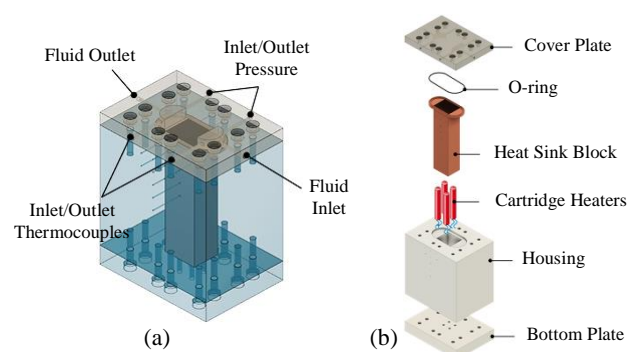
Test section (a) overall assembly (b) exploded drawing.
